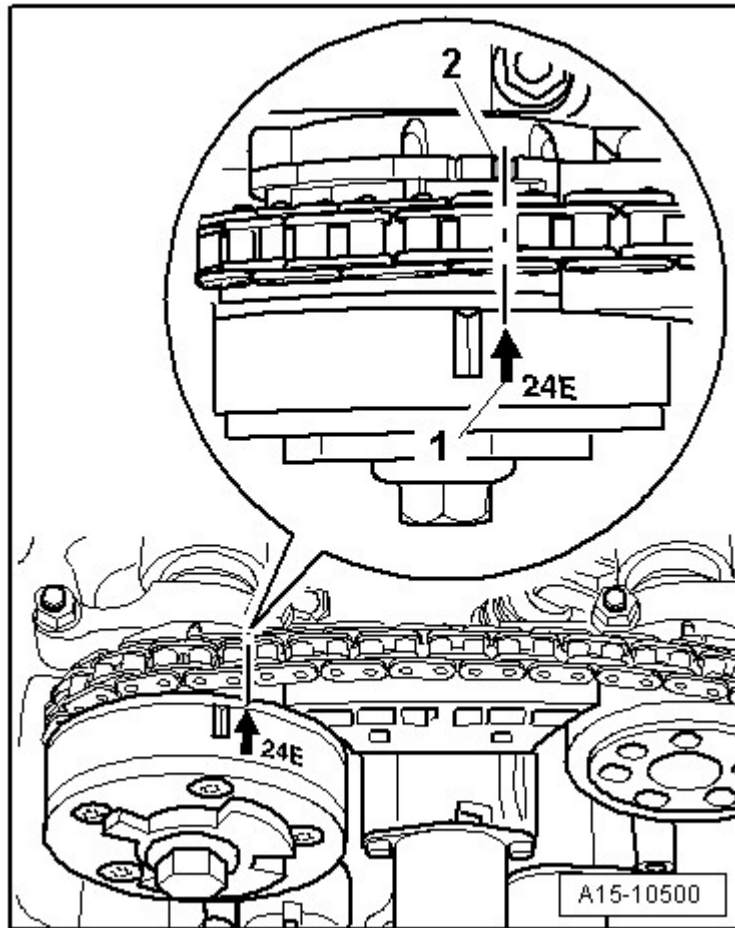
Verifying Installation Marks Of Intake Camshaft Adjuster With Marks On Control Housing
